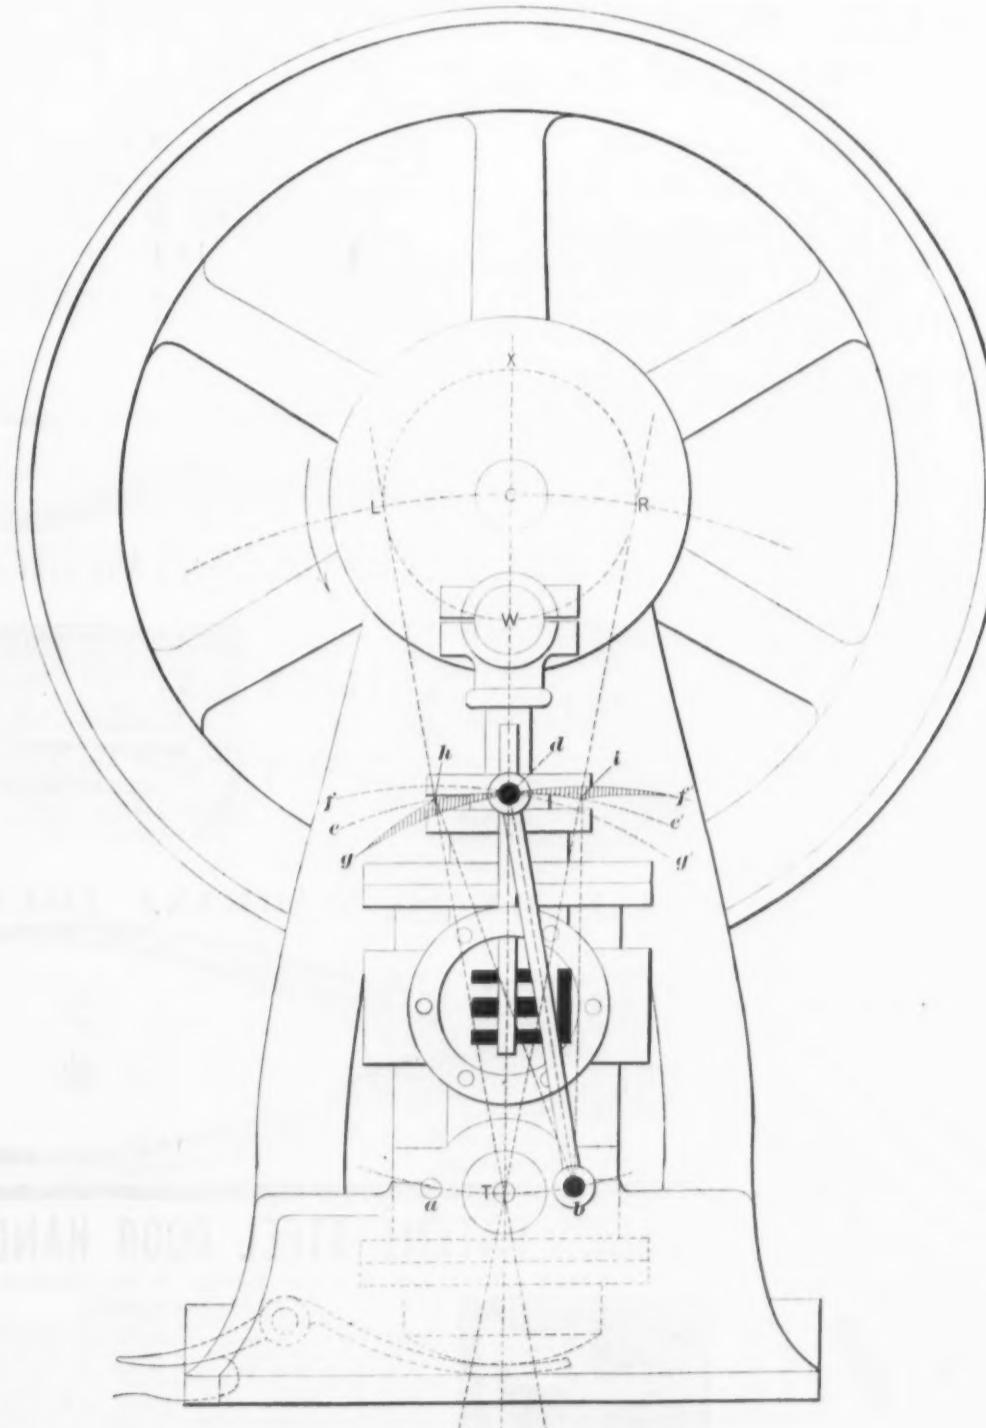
Elevation, Showing Arrangement of Valve Gear.
